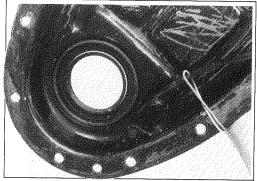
Thread a piece of string or flexible wire around the tensioner and pull into its operating position against the side of the cover.
